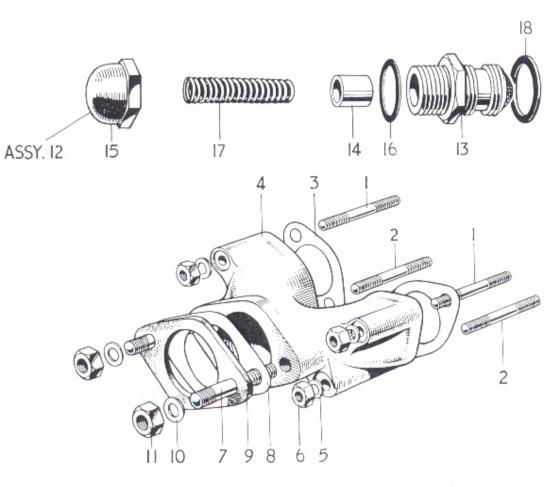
OIL PUMP, RELEASE VALVE AND INLET MANIFOLD
